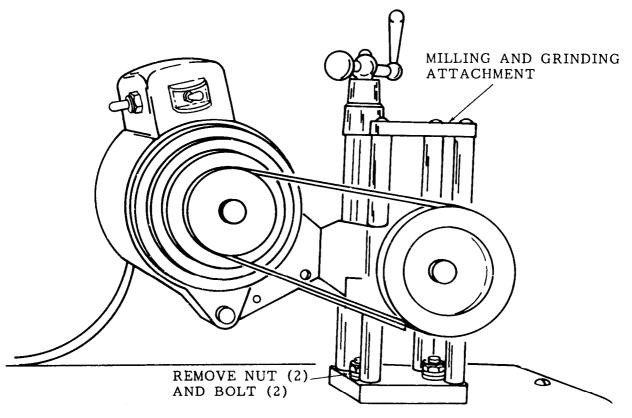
Milling and Grinding Attachment, Removal and Installation.
